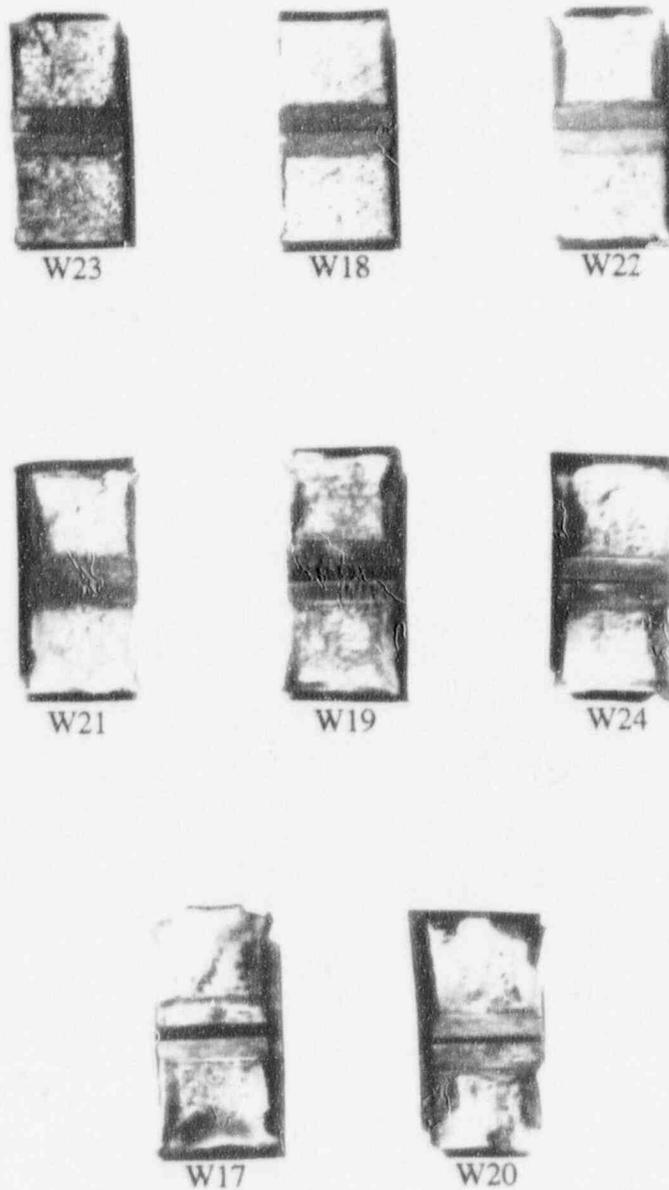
Charpy Impact Specimen Fracture Surfaces of the Prairie Island Unit 1 Reactor Vessel Weld Metal
